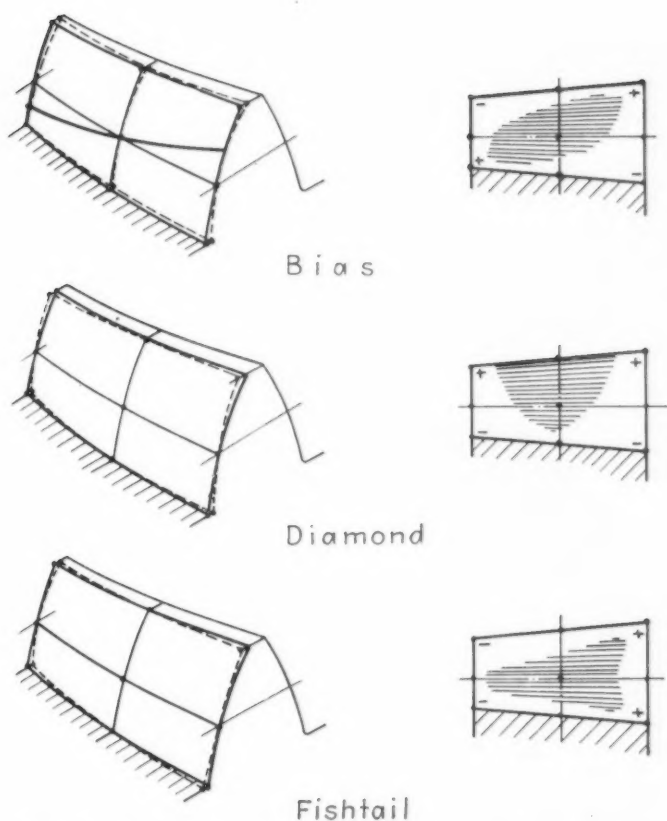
The kind of surface mismatch that results in a bias tooth bearing in mating spiral bevel gears can be corrected in pinion generation by changes in machine settings that can be directly calculated. Less common are diamond and fishtail tooth bearings, which can be corrected by trial and error.
